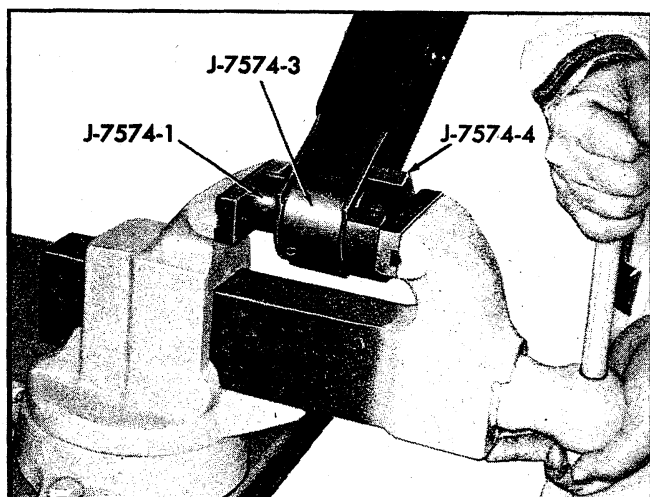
Lower Control Arm Front Bushing Removal (Chevrolet)
